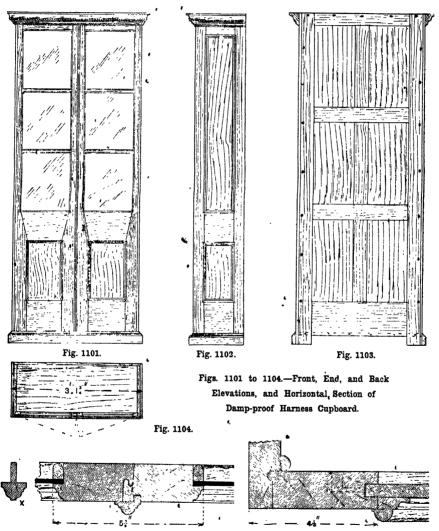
Horizontal Section through Meeting Stiles of Cupboard Doors.
